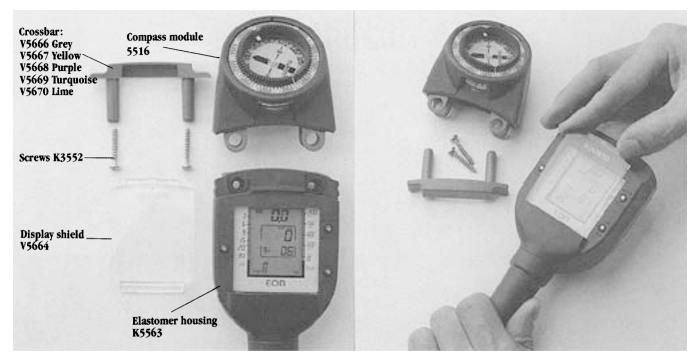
DISASSEMBLED Eon COMPUTER.
